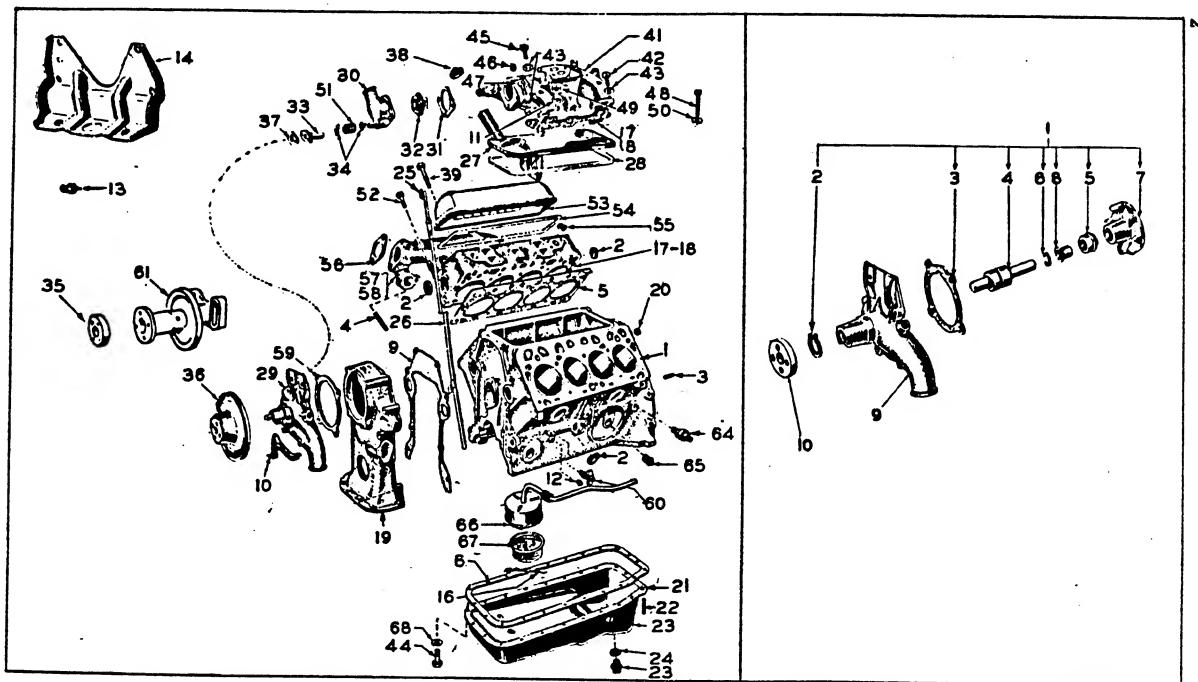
EXTERNAL VIEW, ENGINE PARTS GROUP
